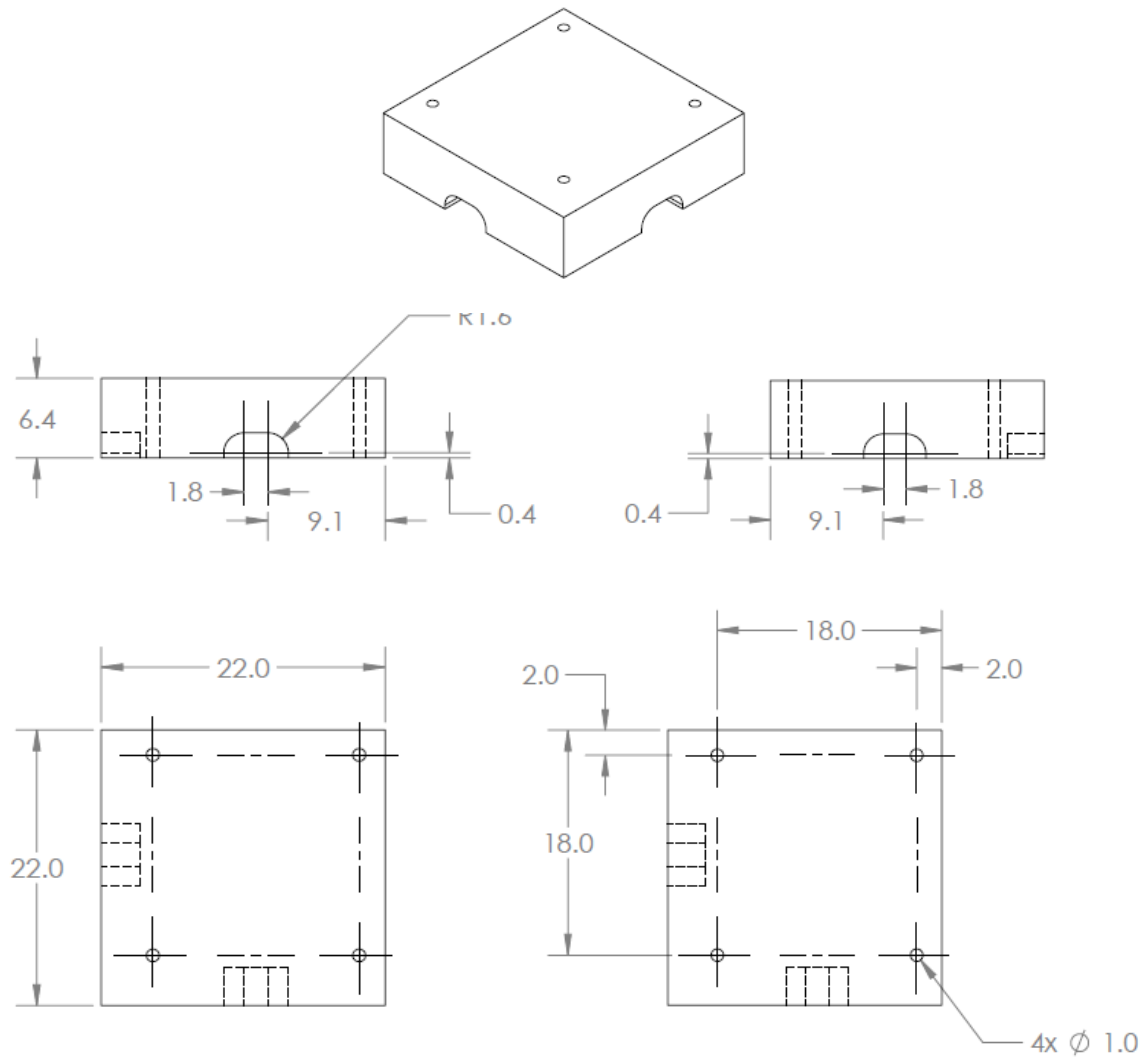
Technical drawings of the manifold assembly fixture (bottom); all dimensions in millimeters unless otherwise specified.
